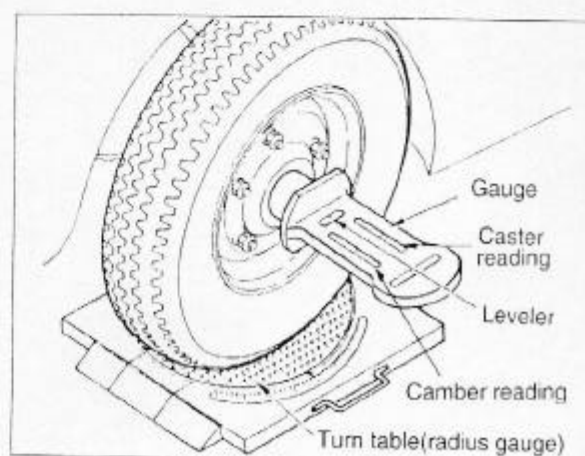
A — 6 CAMBER, CASTER, KING PIN INCLINATION
